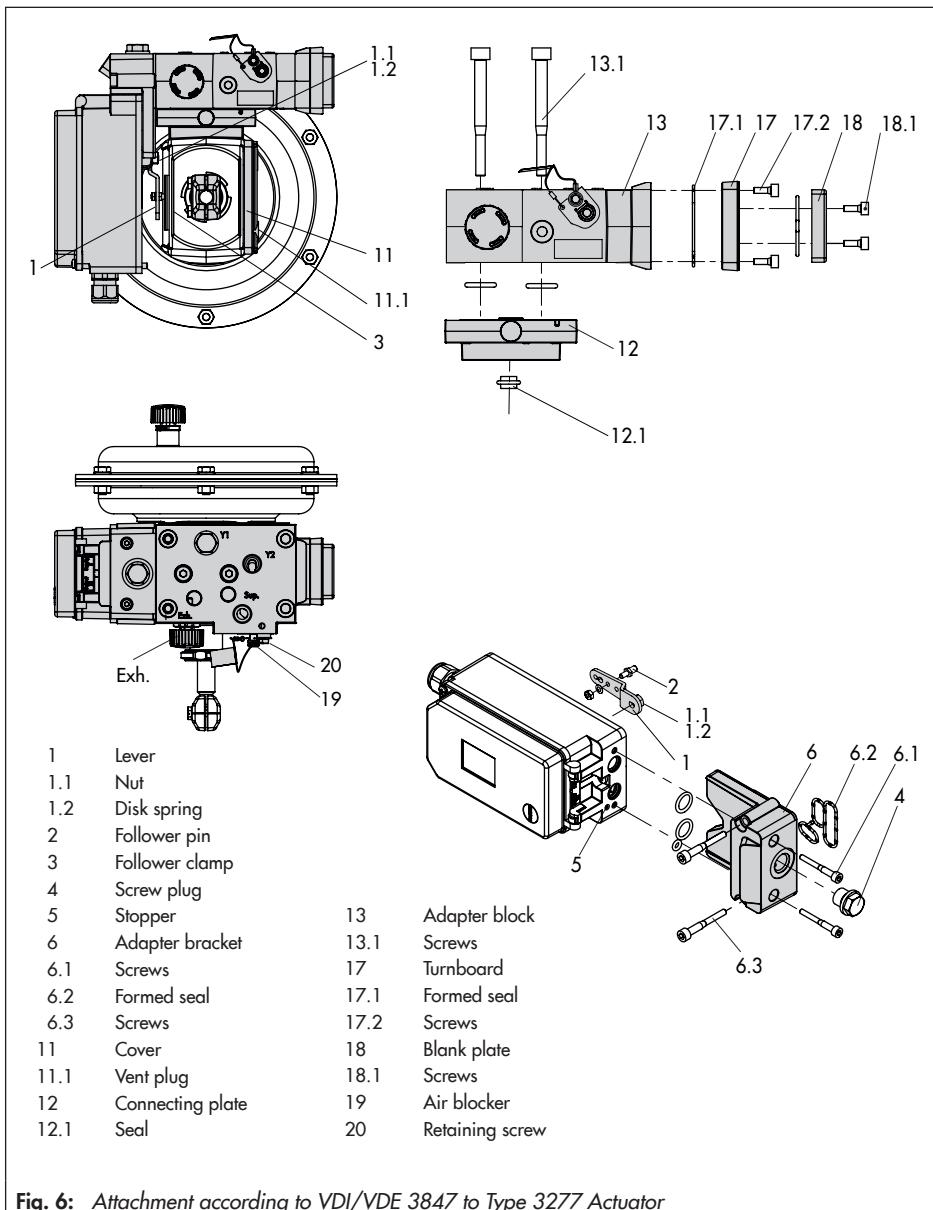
Attachment according to VDI/VDE 3847 to Type 3277 Actuator
